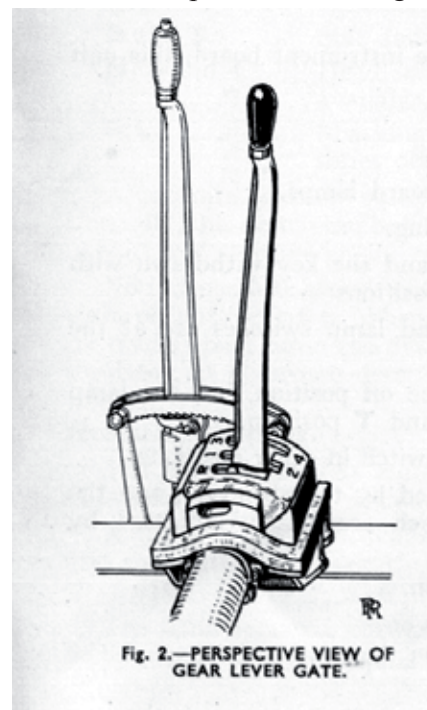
PERSPECTIVE VIEW OF GEAR LEVER GATE.
